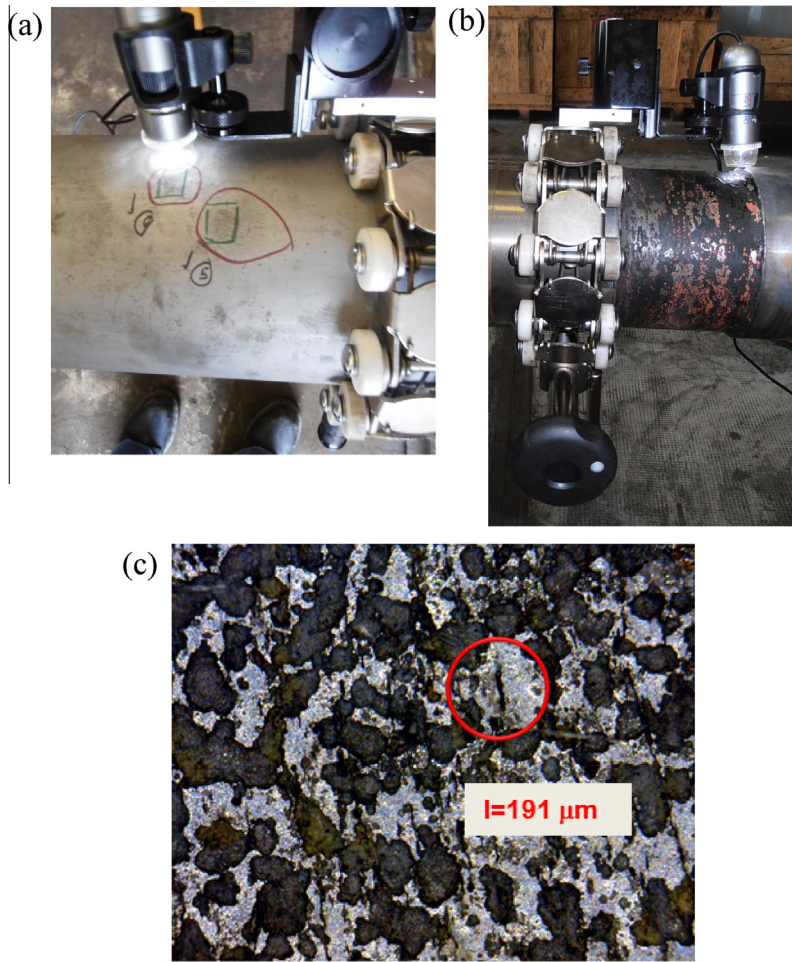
Optical device for damage detection: (a) the microscope, holder and scanner; (b) deployment in inspection of a full-scale specimen; (c) microcrack detection during a corrosion fatigue test onto a 'full scale' axle specimen.
